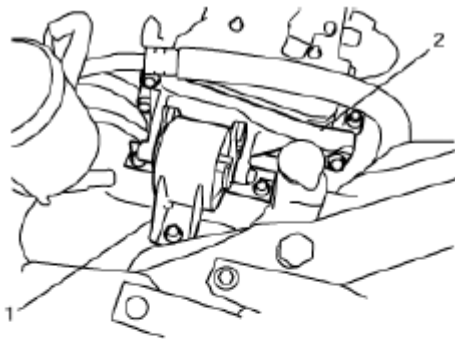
Identifying Engine Left Mounting Bracket Bolt & Nuts
